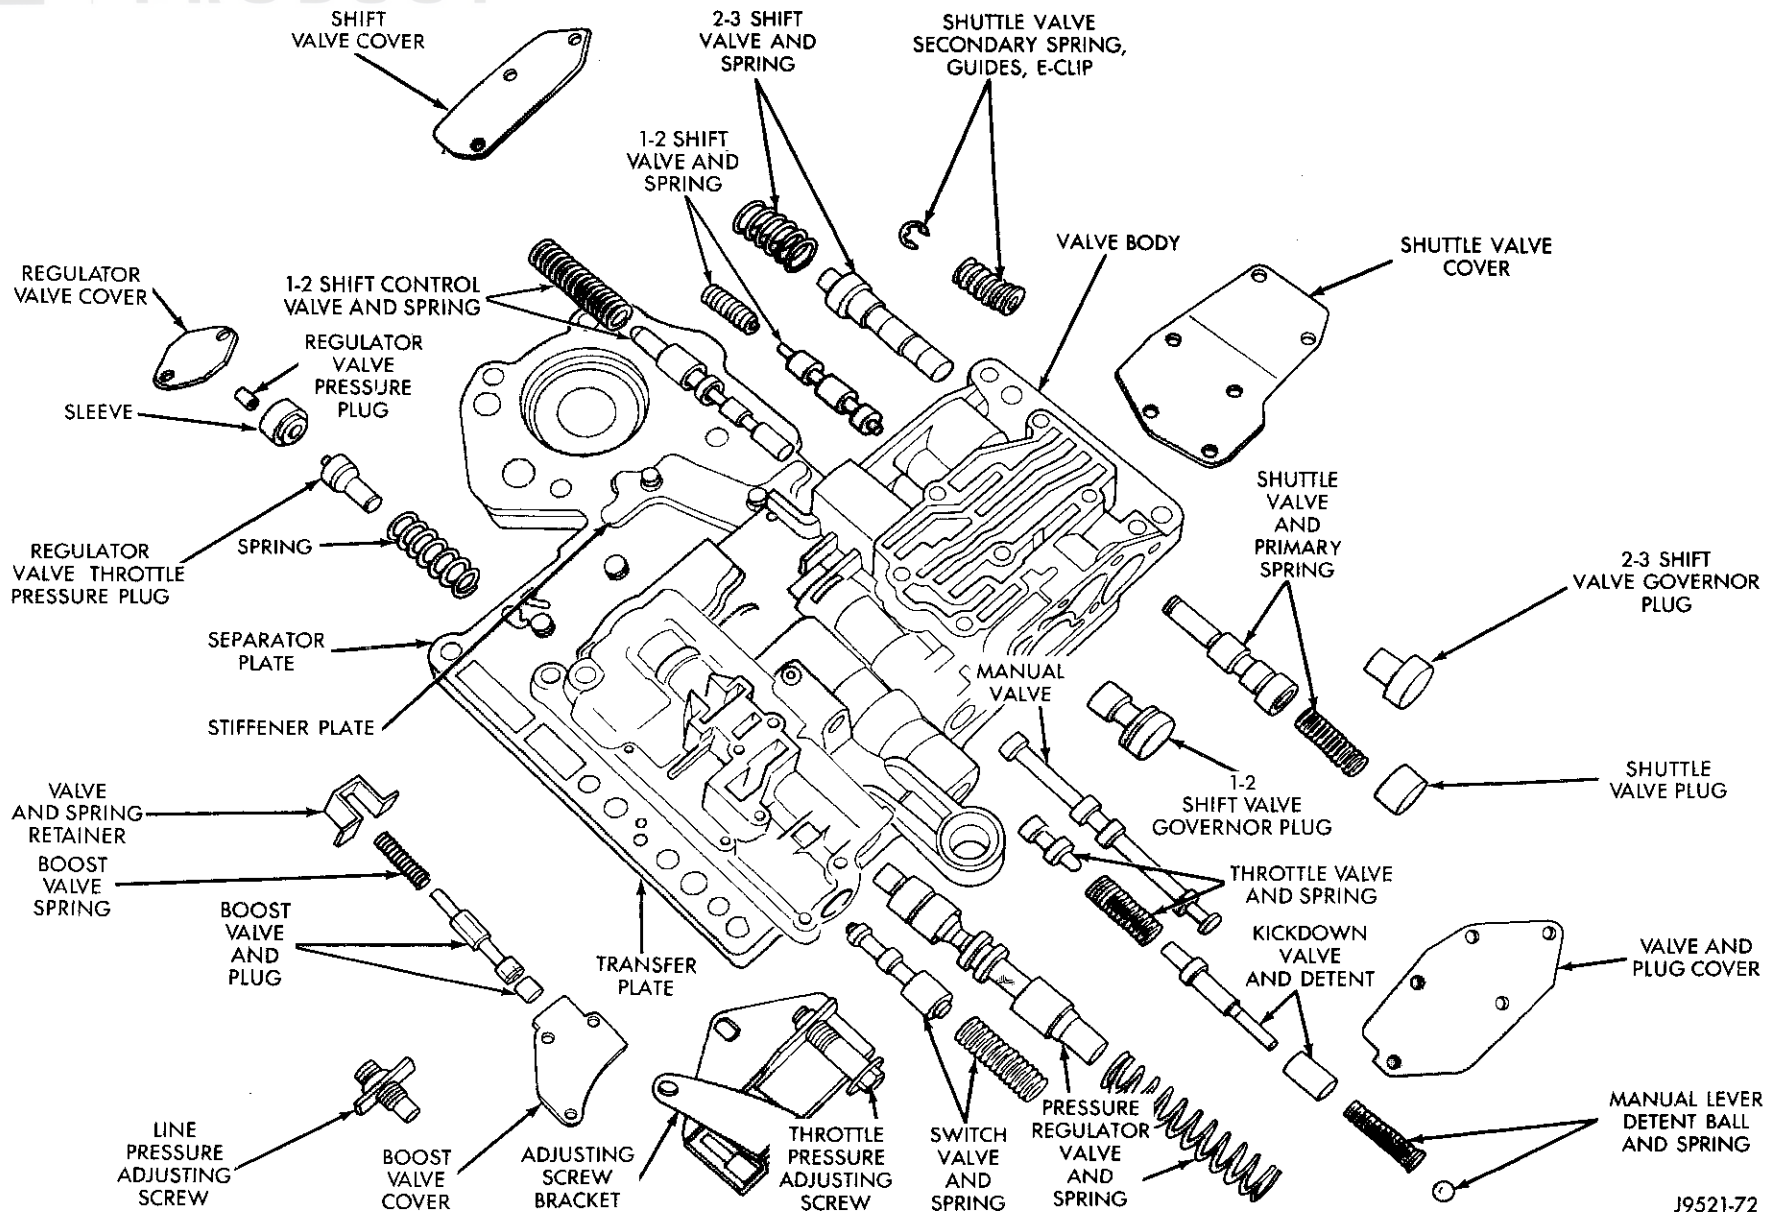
Upper Housing Valves, Plug, Springs And Brackets
